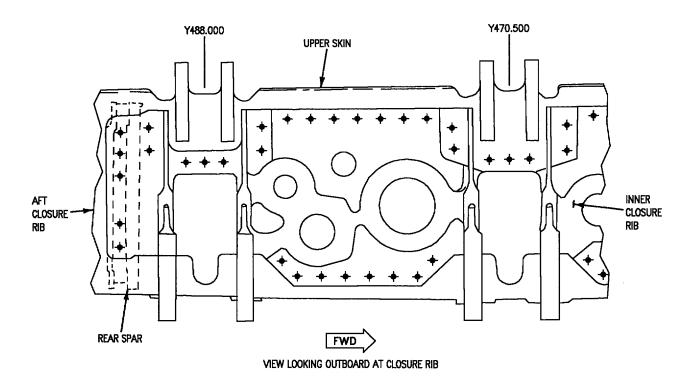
Inner Closure Rib Fasteners and Repair Fasteners (Sheet 3)
